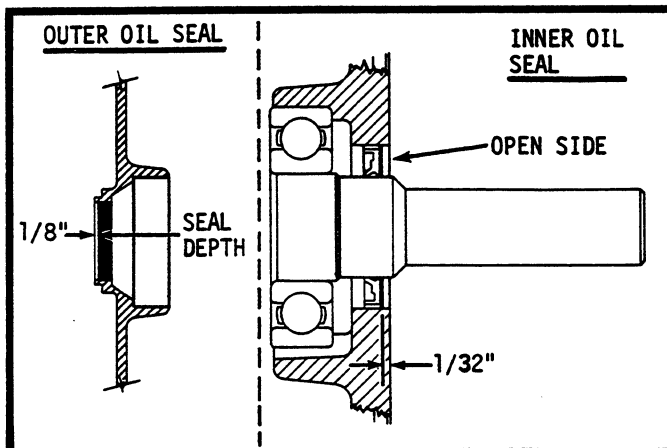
OIL SEAL INSTALLATION DETAILS
